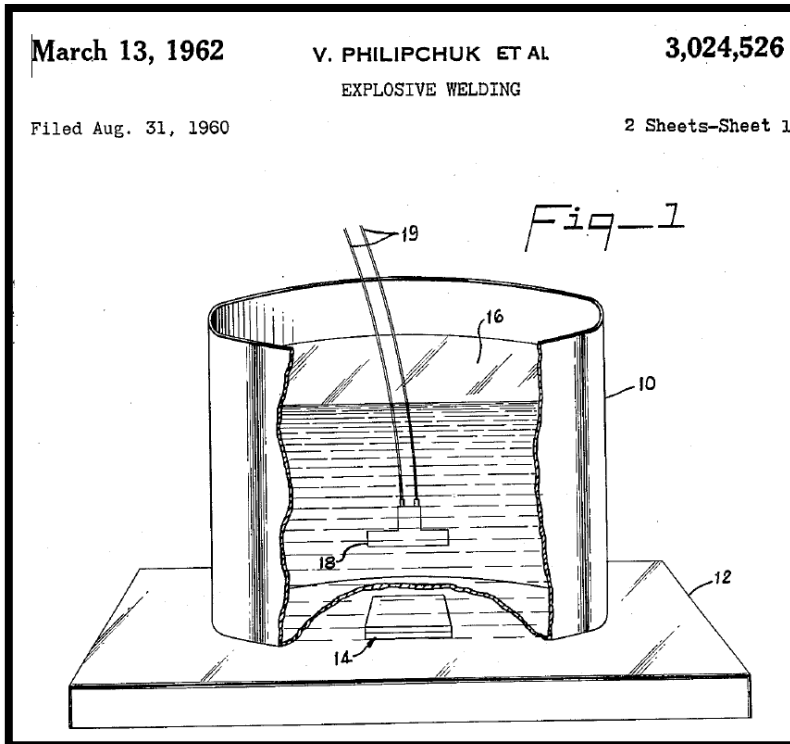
Diagram of Philipchuk's patented explosive welding process, taken from his 1962 patent.[33]
